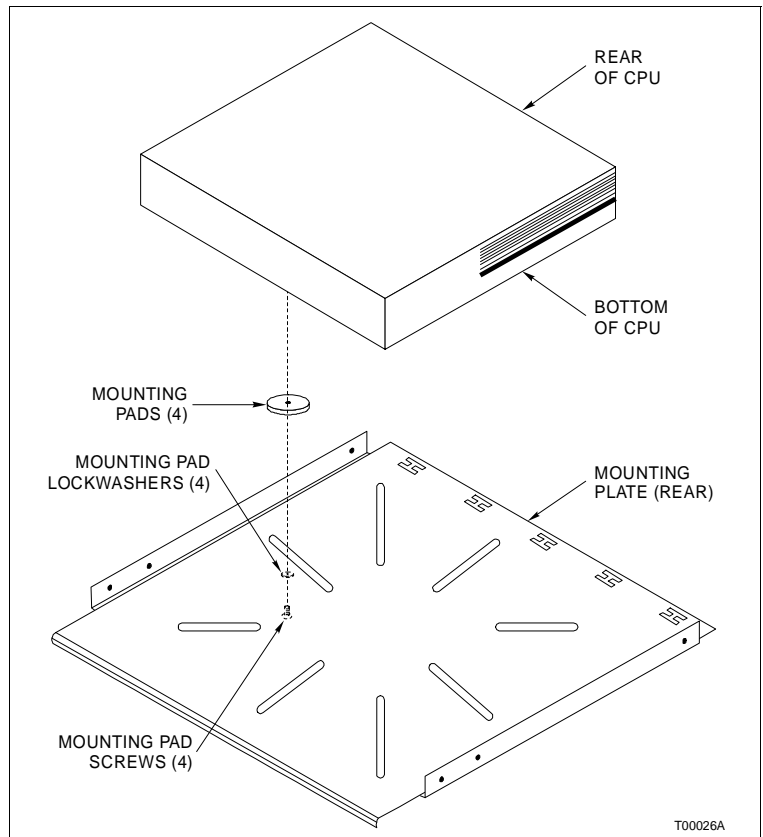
Mounting CPU on Mounting Plate (Typical)
